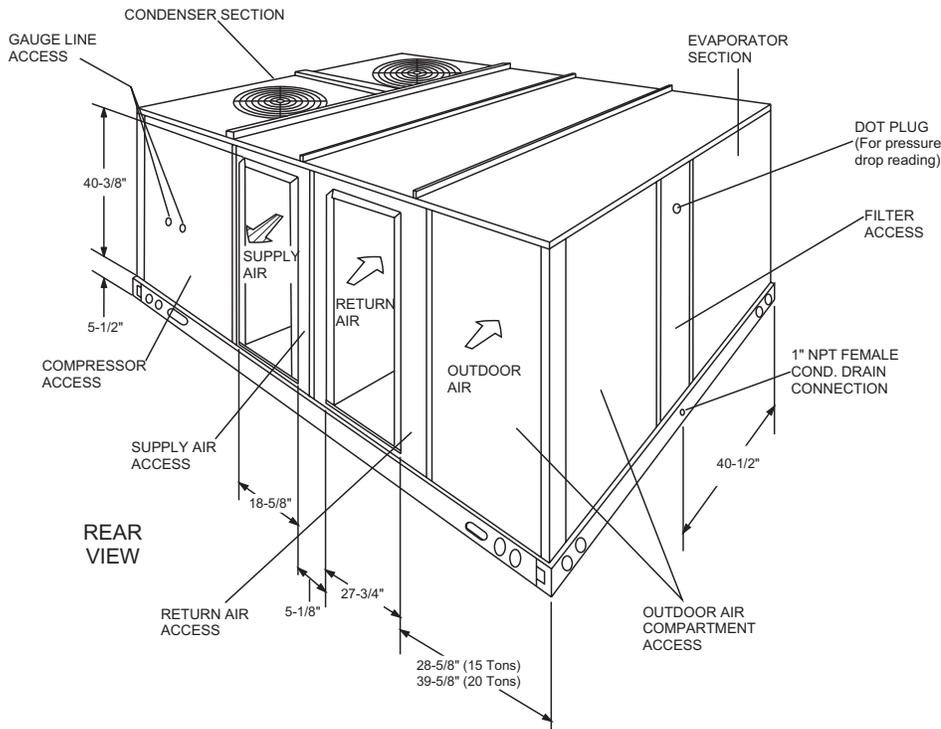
UNIT DIMENSIONS DHE/DHG180 & 240 (REAR VIEW)
